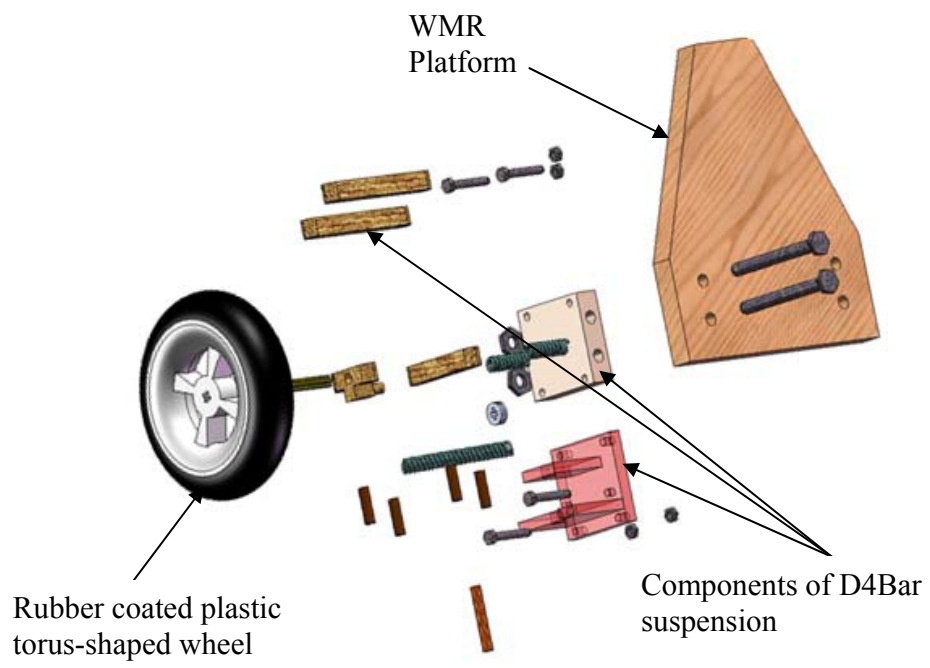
Exploded view of one wheel, suspension components and WMR platform
